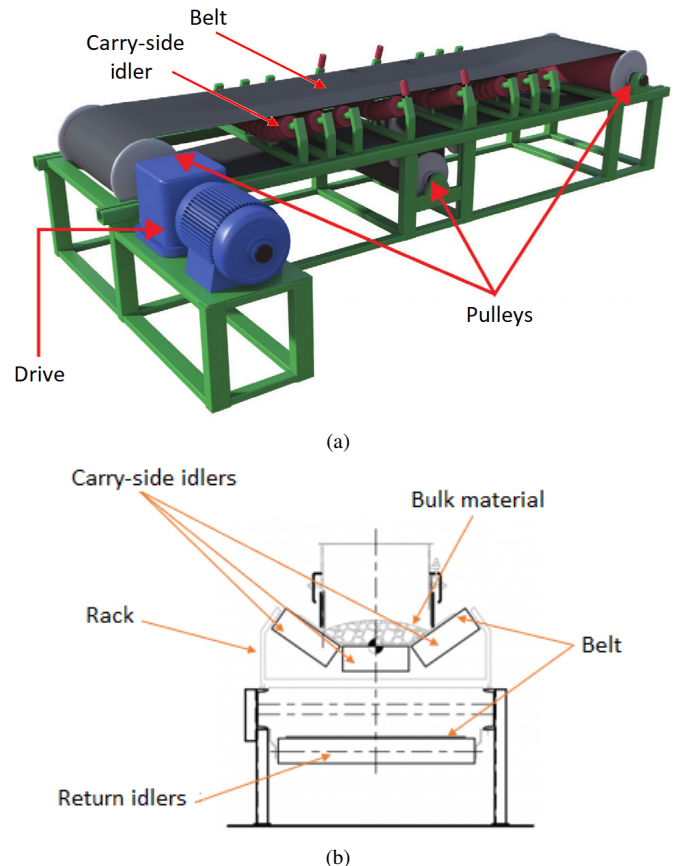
(a) Simplified scheme of a Belt Conveyor, adapted from [1]. (b) Conveyor cross section, with carry-side and return idlers, adapted from [2].
